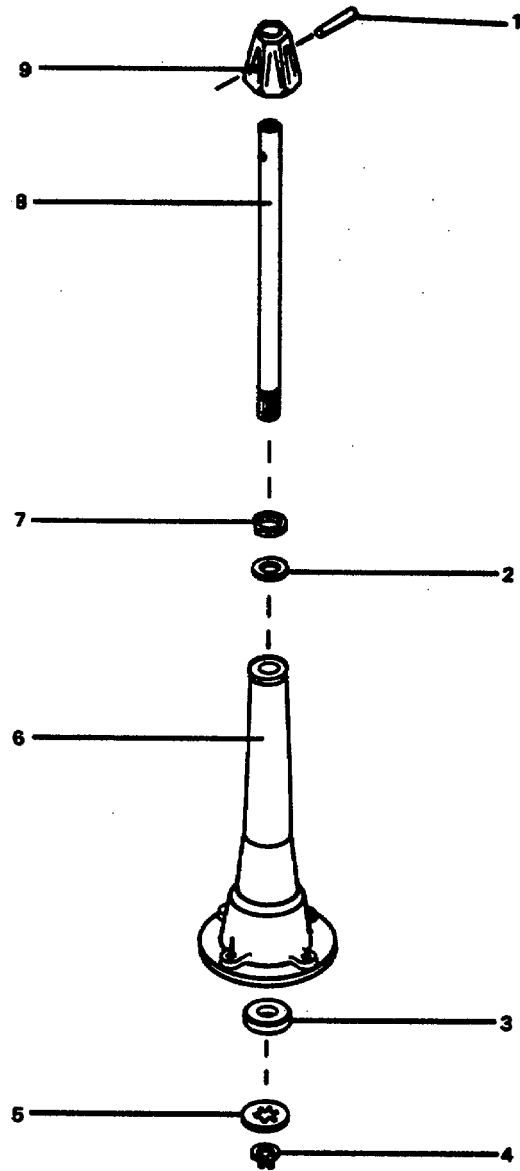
Washer Machine Agitator Post Assembly.
